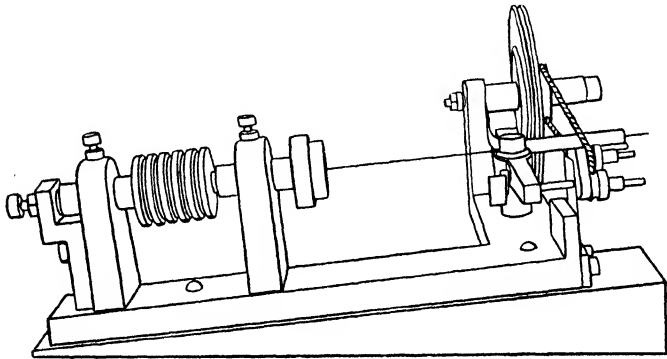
Polishing machine with rotating die and rotating needle. Machine somewhat inclined
